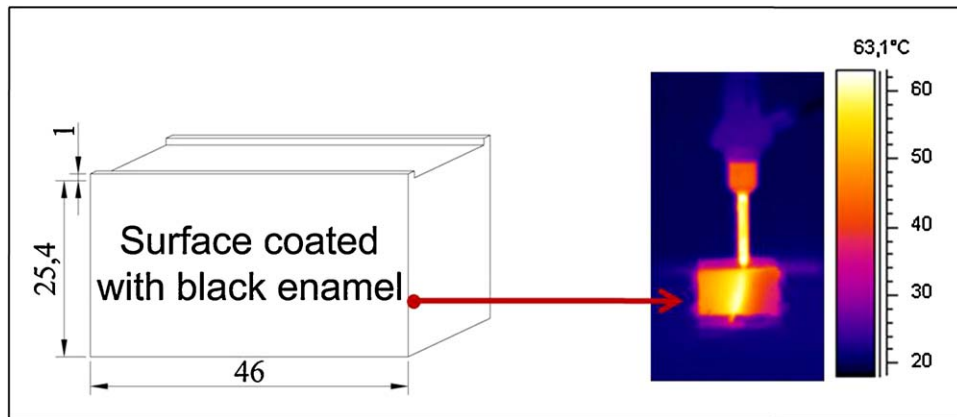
Workpiece shown schematically with coated surface and thermogram with cutting head and workpiece.
